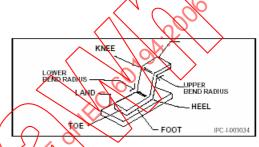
Leaded surface-mount component gull-wing shaped lead
